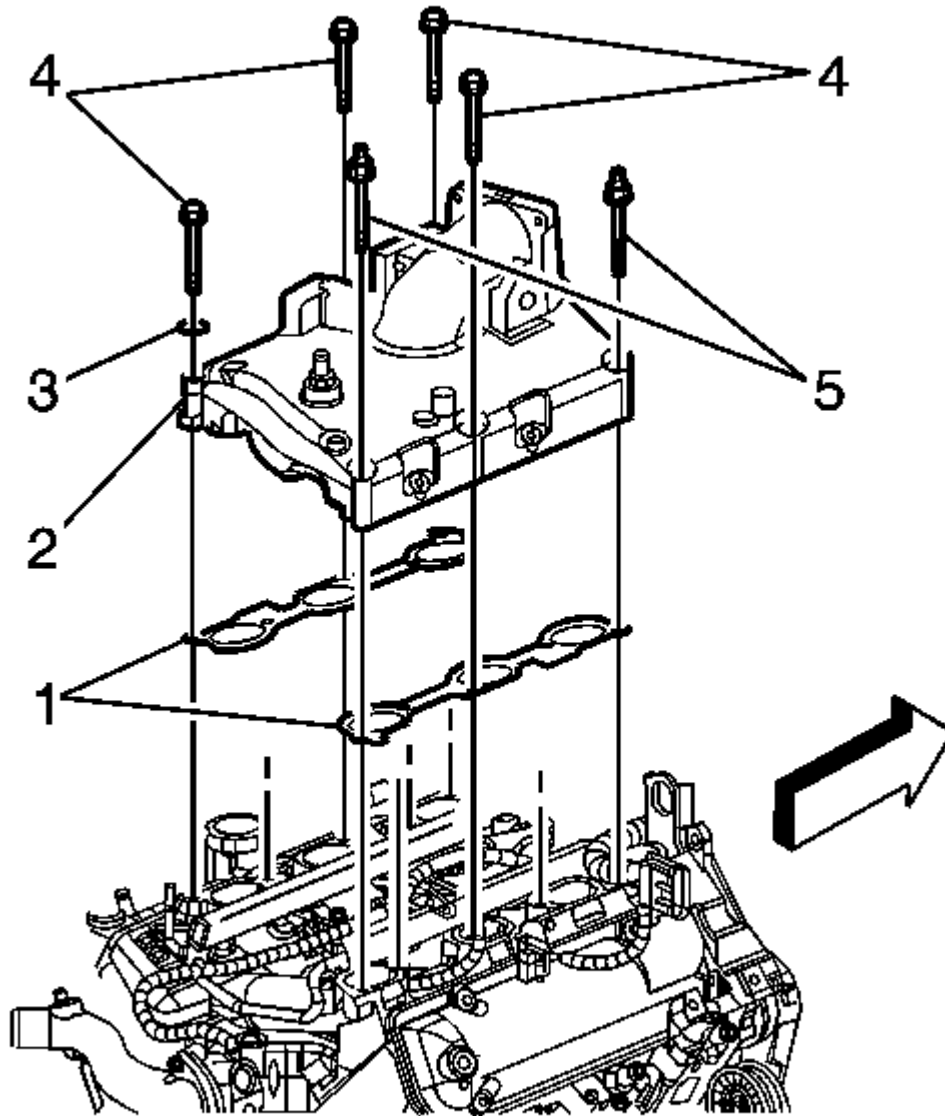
View Of Upper Intake Manifold, Gaskets & Bolts
